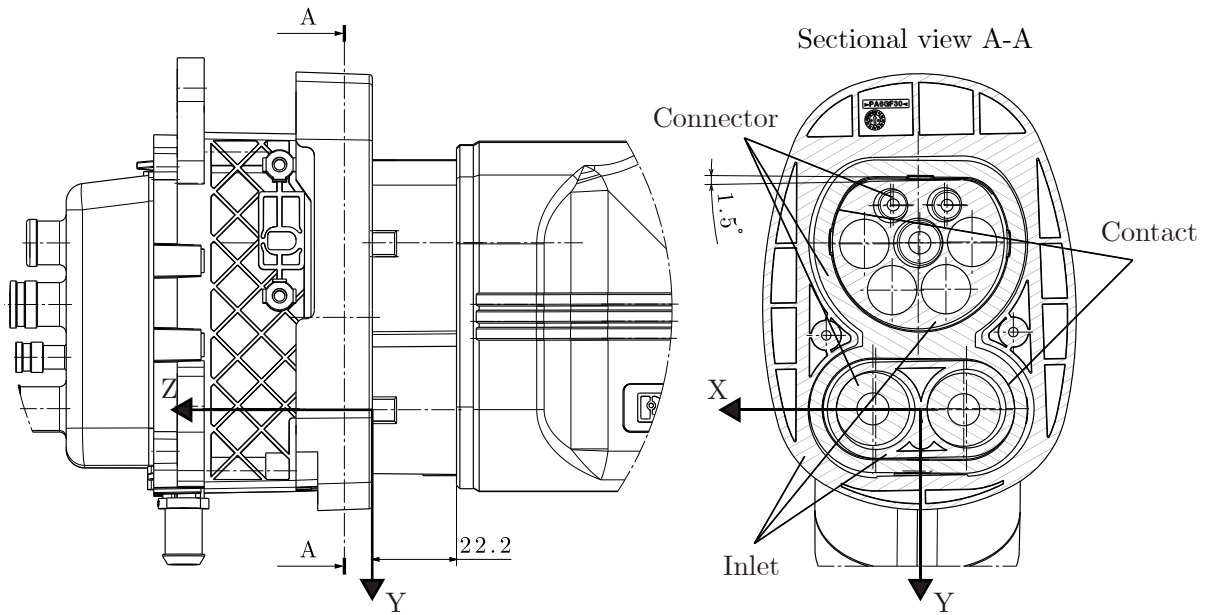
Left: Side view of inlet and connector CAD-models in plugged position. Right: Sectional view A-A of with a Z -axis rotation displacement of 1.5° .
